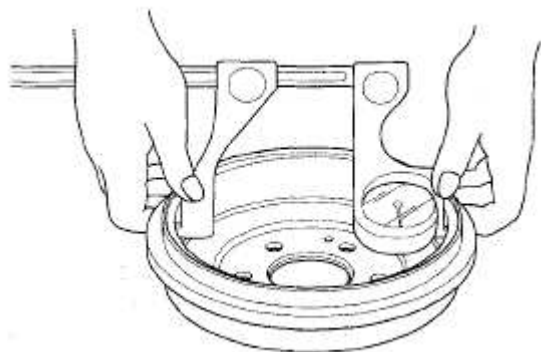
Measuring Inside Diameter Of Brake Drum With Inside Vernier Calipers
